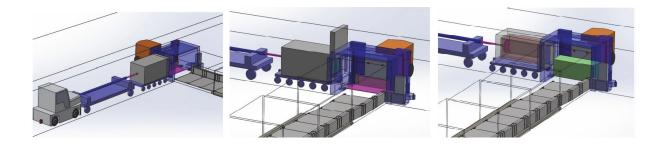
Transfer of the Buffer Box from Transfer Cask to Placement Forklift Using Hydraulic Cylinder Equipment
